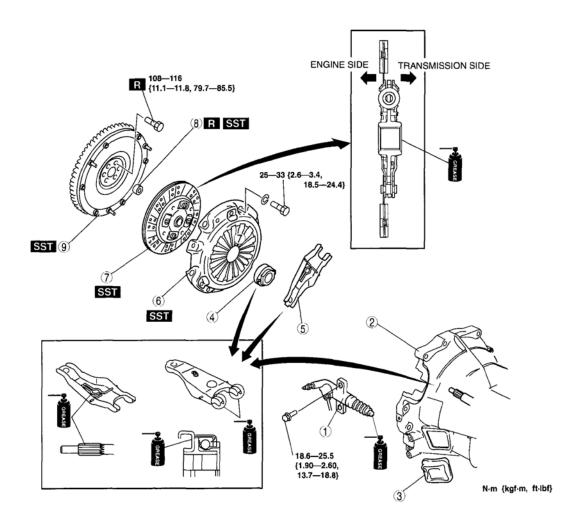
Exploded View Of Clutch Release Cylinder Components (With Torque Specifications)
